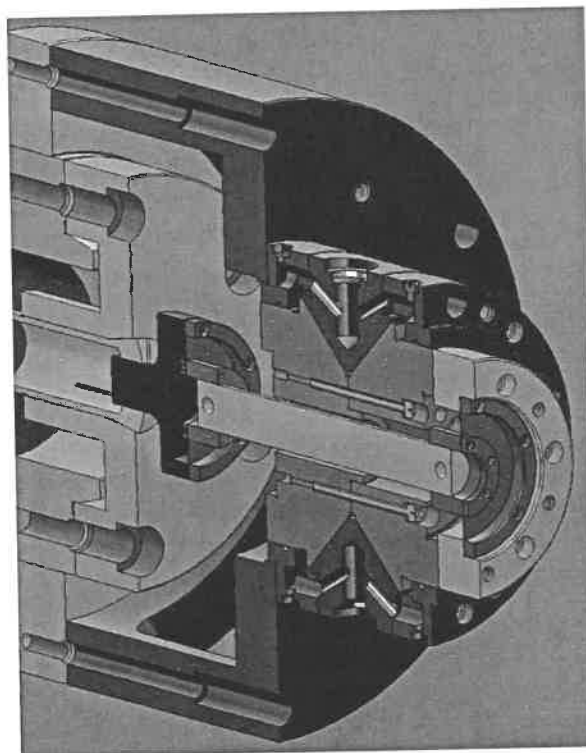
SolidWorks rendering shows details of the installation of the 4R-H spindle and diaphragm coupling drive.
